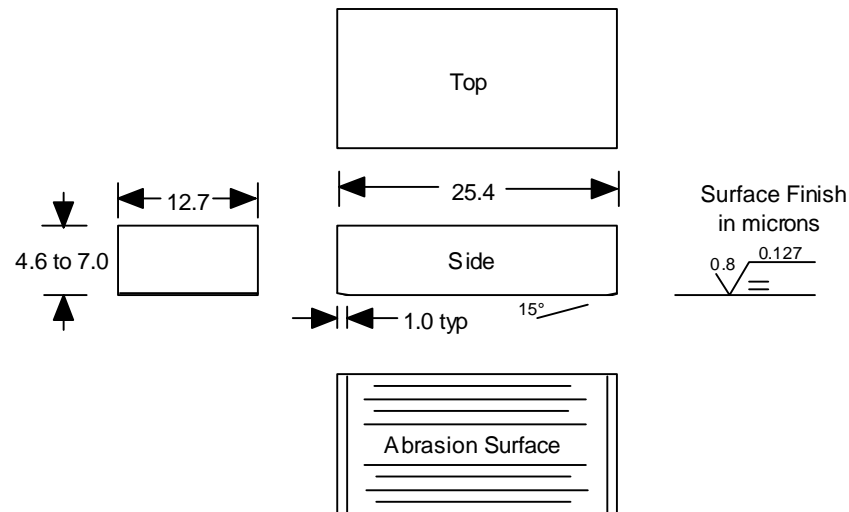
Typical metal specimen (the dimensions are in millimeters except where noted)
